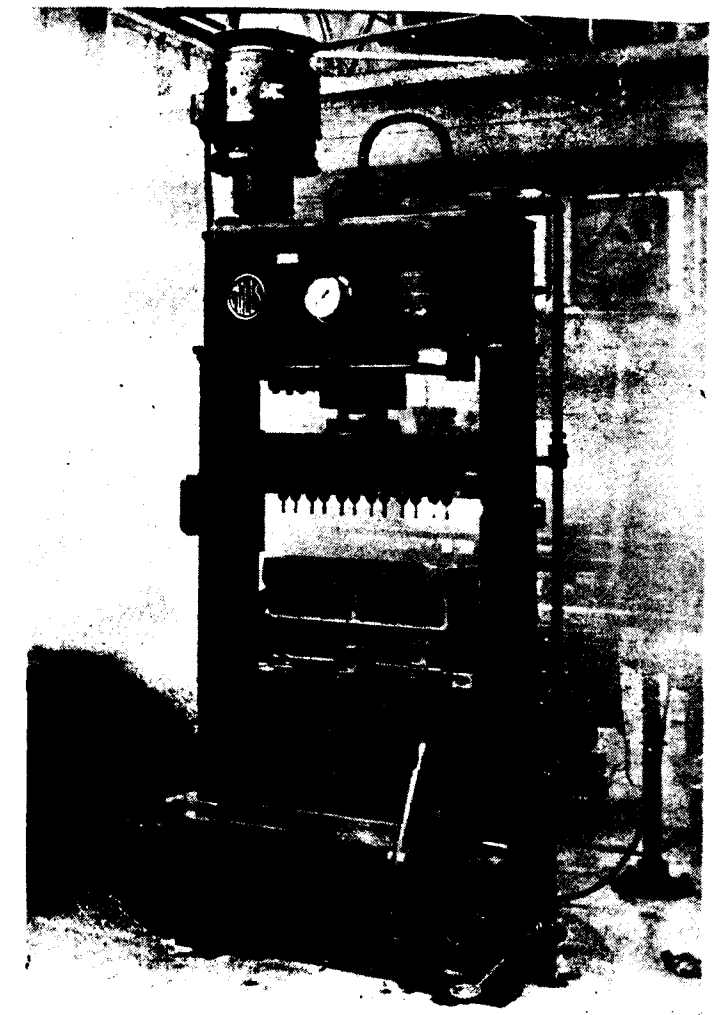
A Mills Forcing Press for the simultaneous fitting of twelve valve guides in crank cases.
